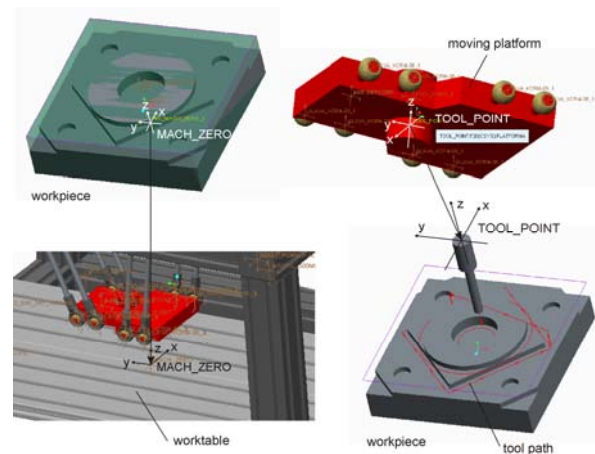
Coordinate system of the workpiece and tool with tool path simulation
